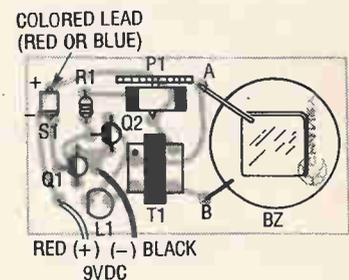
Follow this parts-placement diagram carefully when assembling the Infrared Detector. Be sure to face the flat edges of Q1, Q2, and L1 as shown.
